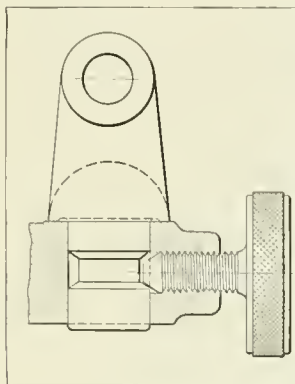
Clamping Screw with Pull-down Action for Clamping Bearing
